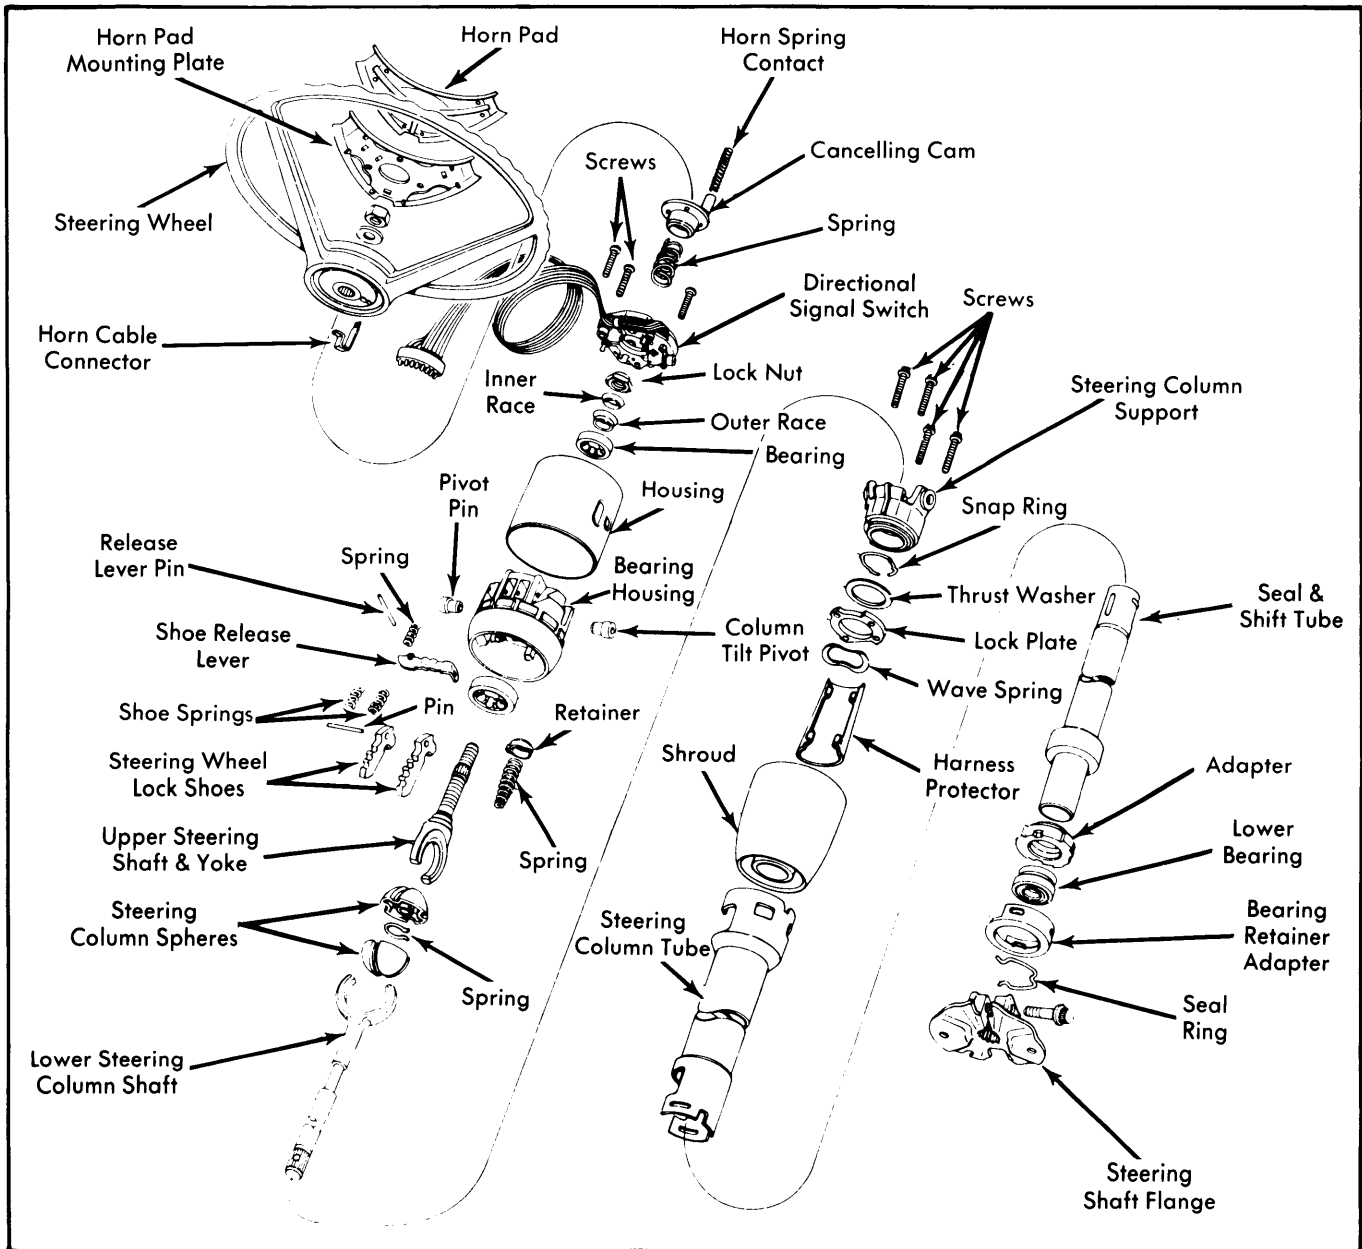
Exploded View of 1310 and 1510MHC Steering Column
